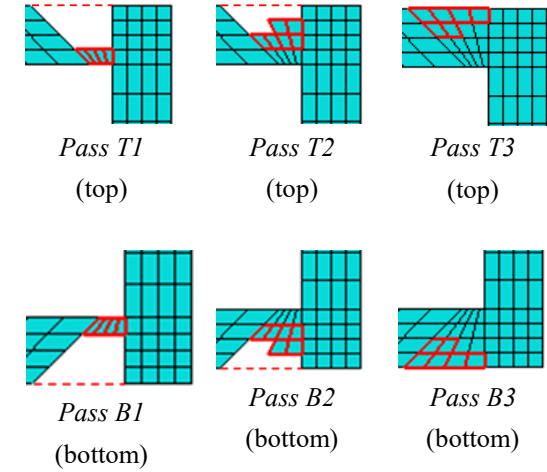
Modelling of multi-pass welding in CFSHS
